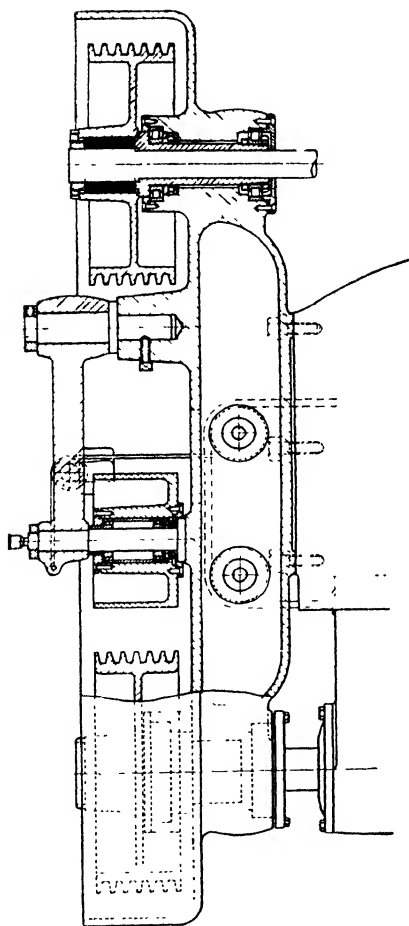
Spindle Construction of a Churchill Grinding Machine and Hydraulic Bearings.
